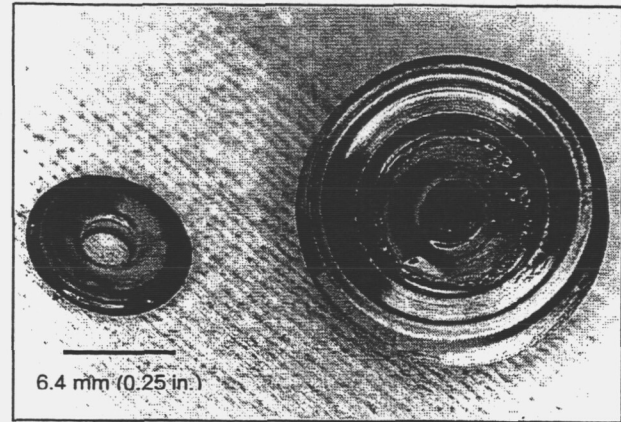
PRCS thruster S/N 217 pilot seat assembly with the retainer and pilot seal removed showing a large quantity of FORP inside the pilot seal cavity.
